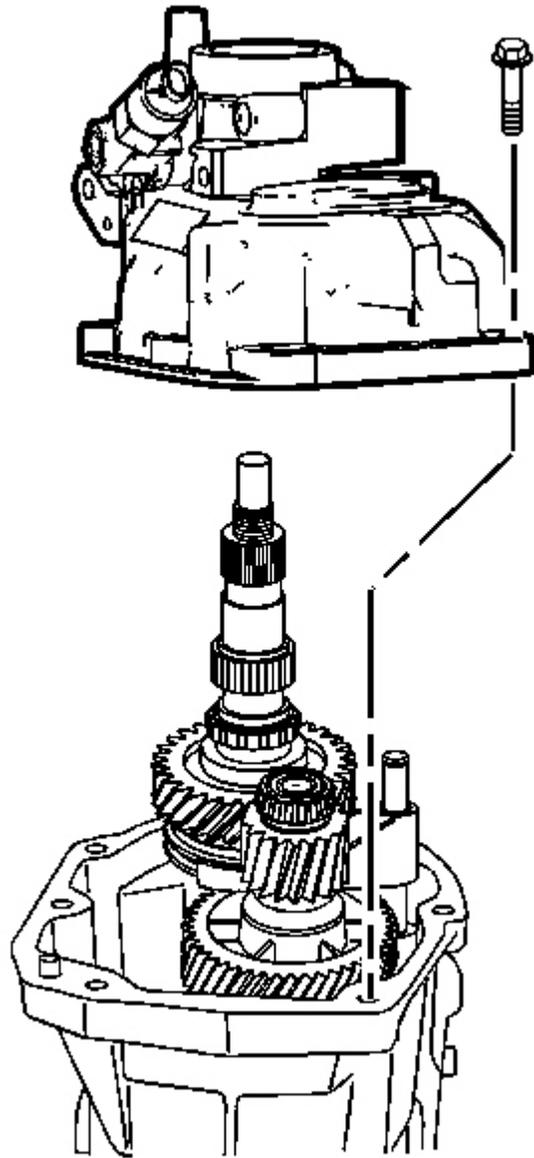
View Of Rear Extension Housing Bolts & Rear Extension Housing
